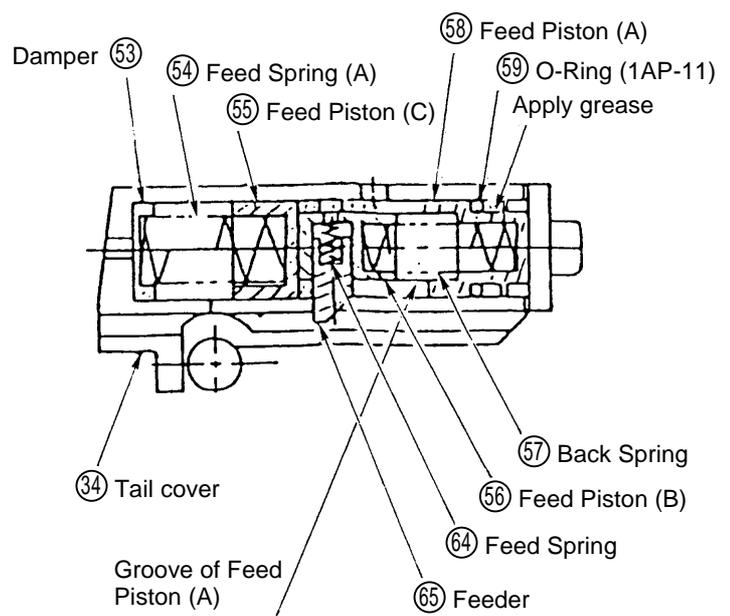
Assembly Drawing for Feeder Piston and Related Parts (Cross Section)
